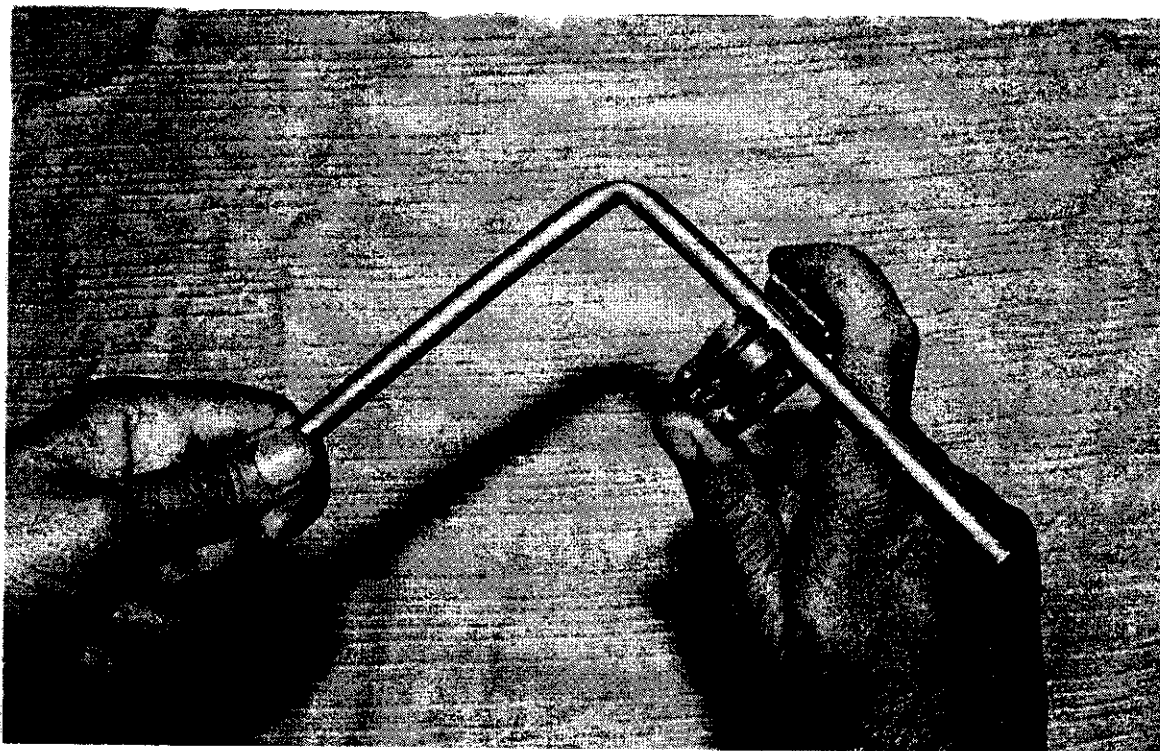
Cutting the end of the Pitot Tube to have a length of 5 cm.
